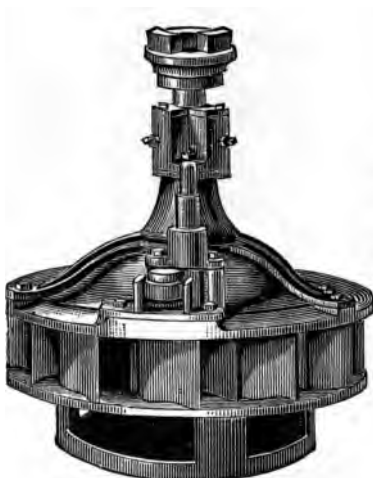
TURBINE-WHEEL IN ITS INNER CASE.
